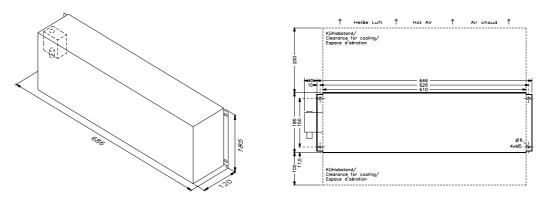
Outline drawing and mounting 0.08RE500
